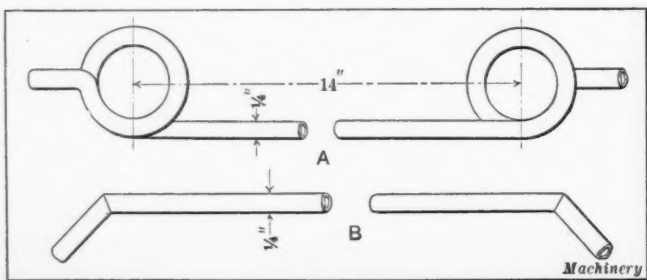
Blank B with Ends bent to Angle of 60 Degrees and Finished Piece A
